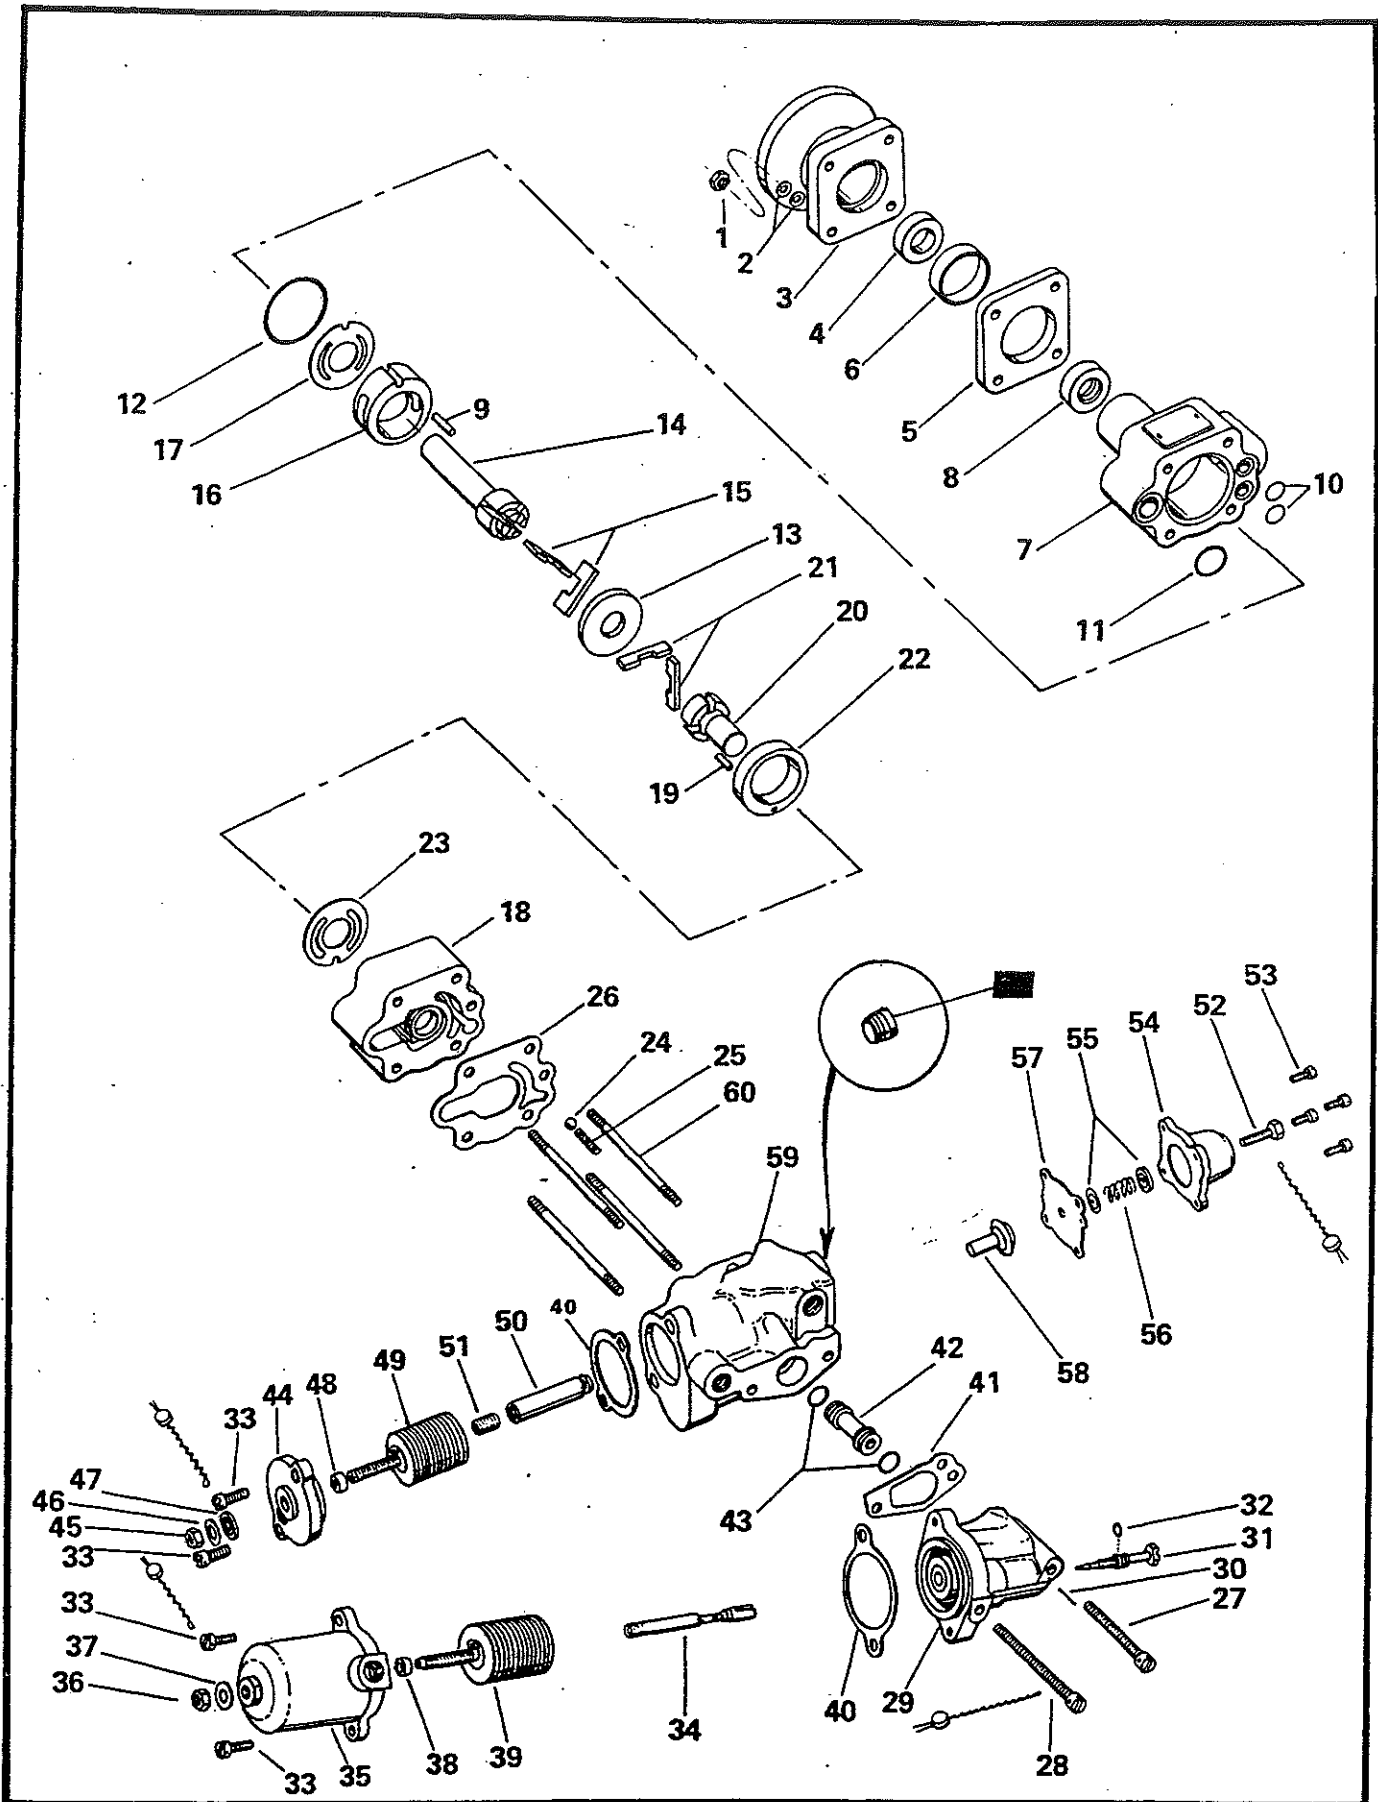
FUEL PUMP ASSEMBLY.
